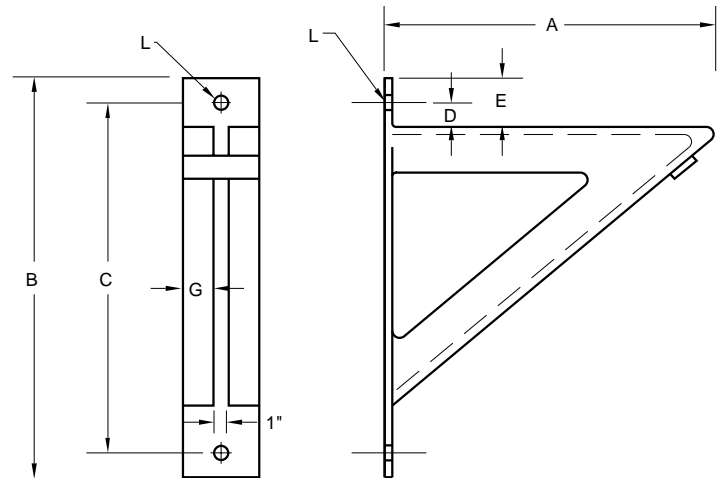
MEDIUM WELDED STEEL BRACKET
